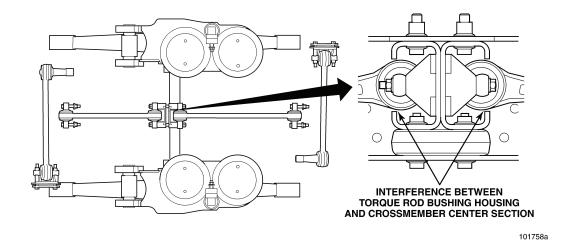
Fore and Aft Torque Rod Interference with Crossmember Center Section
